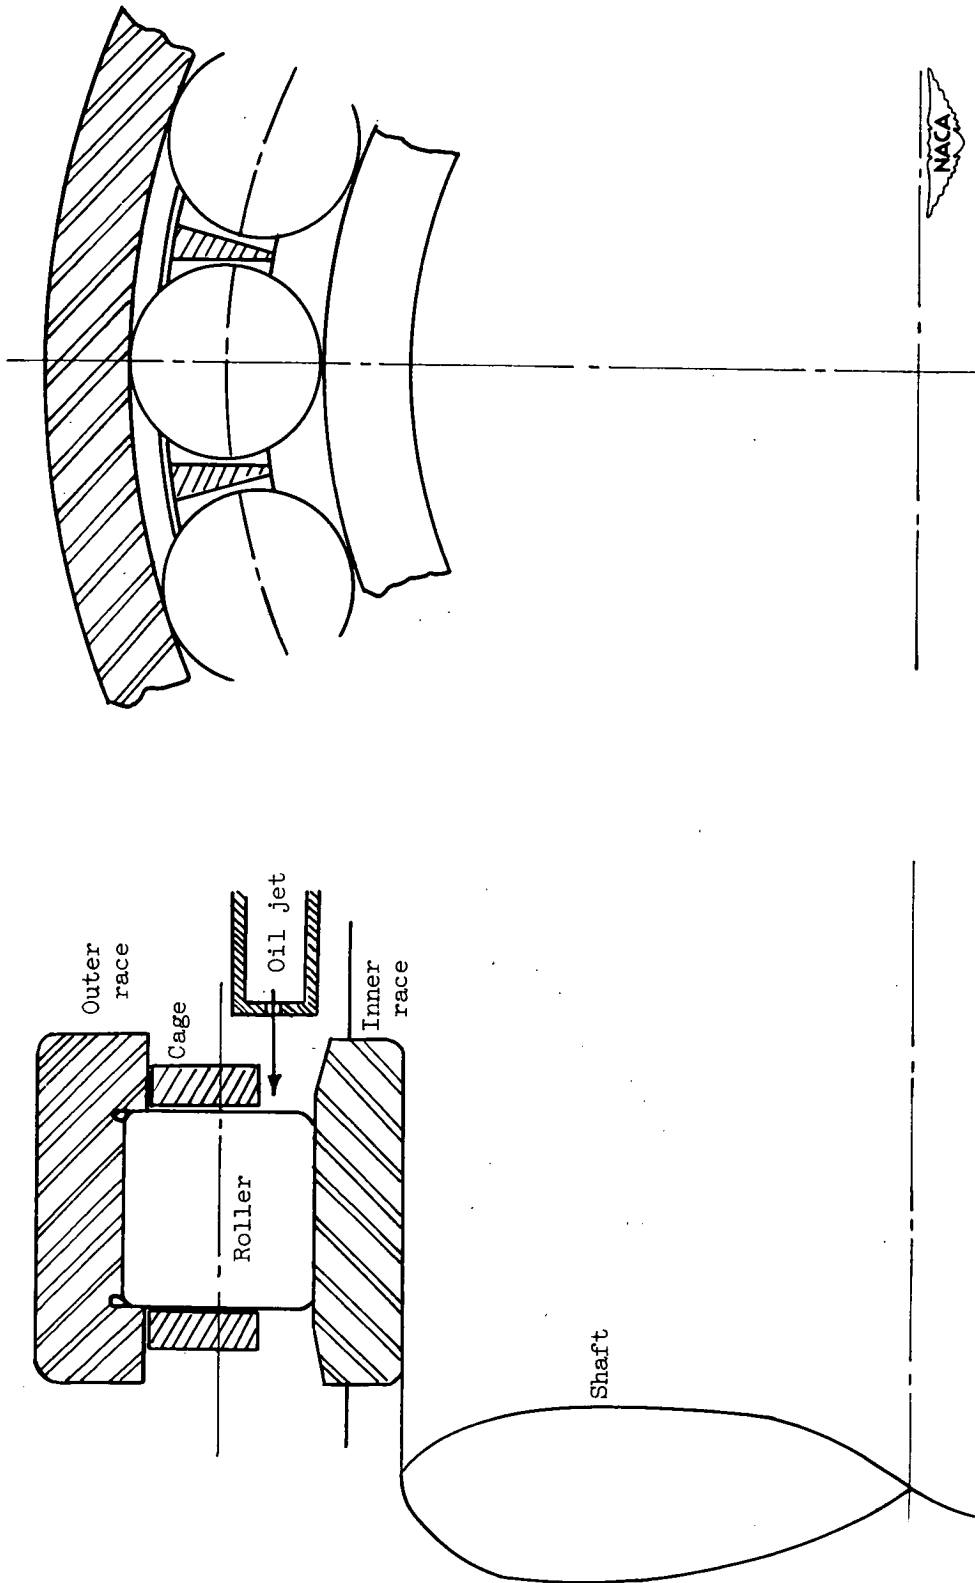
Schematic drawing of test bearings showing location of oil jet.
